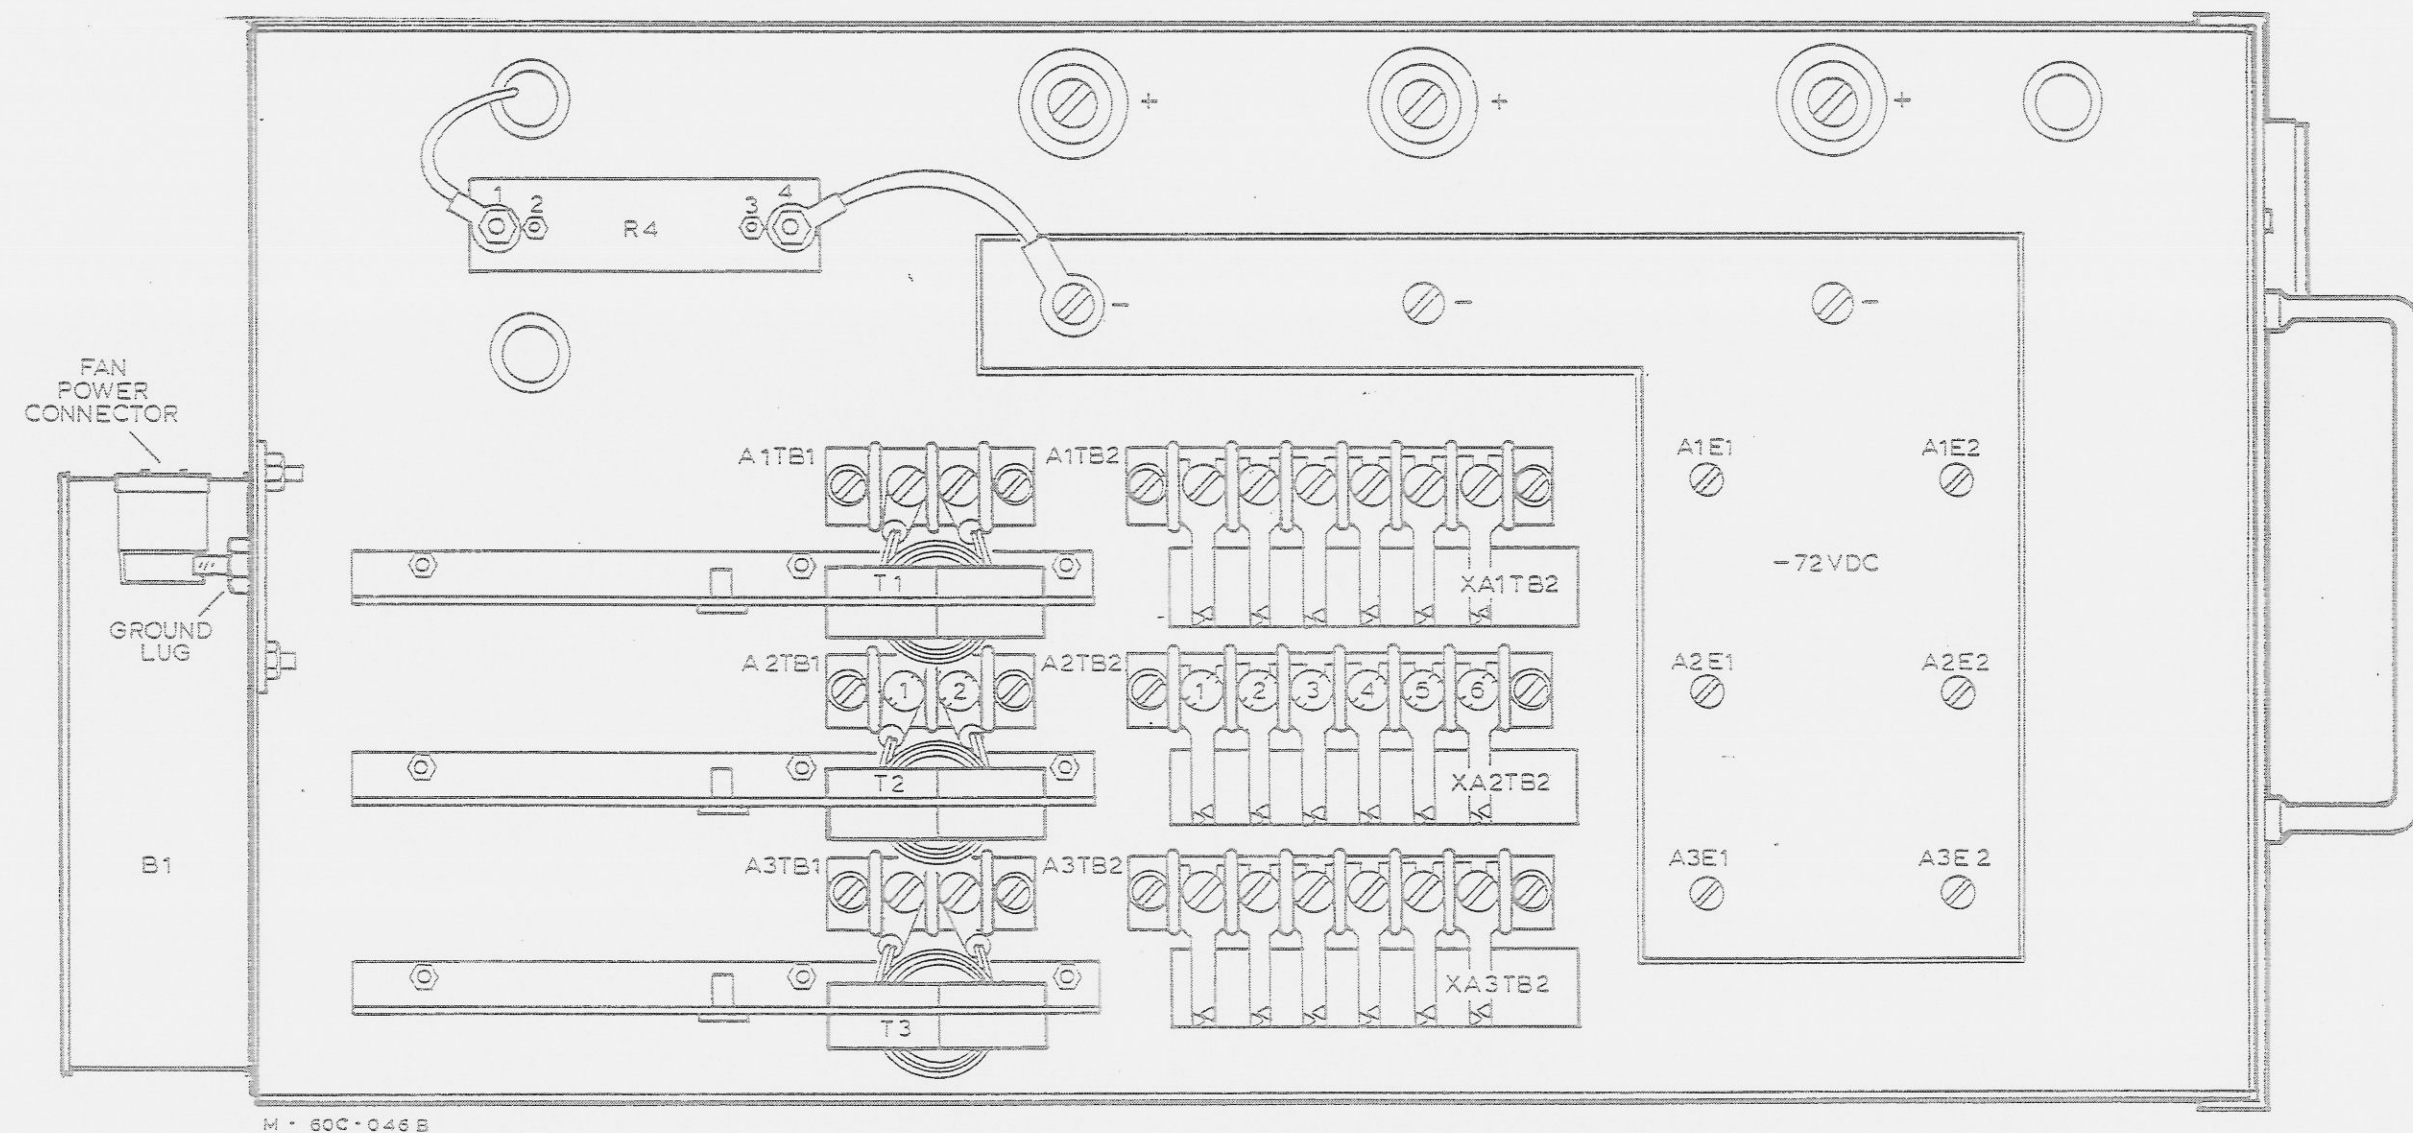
Assembly Detail - NAP10/1 1.25 kW AM Power Subsystem Module (Bottom View)
